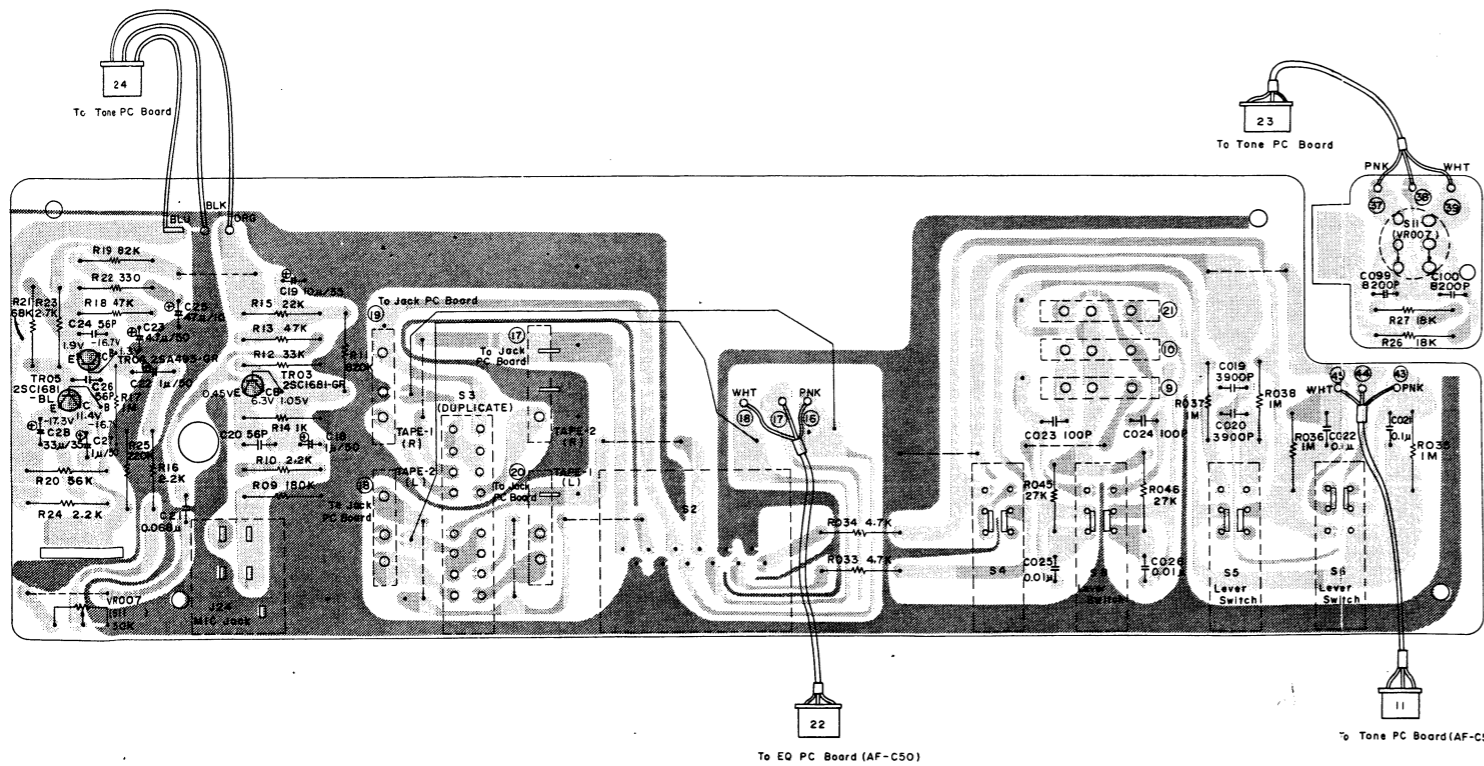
Bottom View of Mic. Amp. P.C. Board (MIC-C04).
